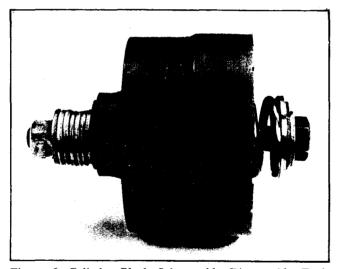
Cylinder Block Subassembly Disassembly Tool. (Tighten nut, remove snap ring, loosen nut to relieve spring tension.)
